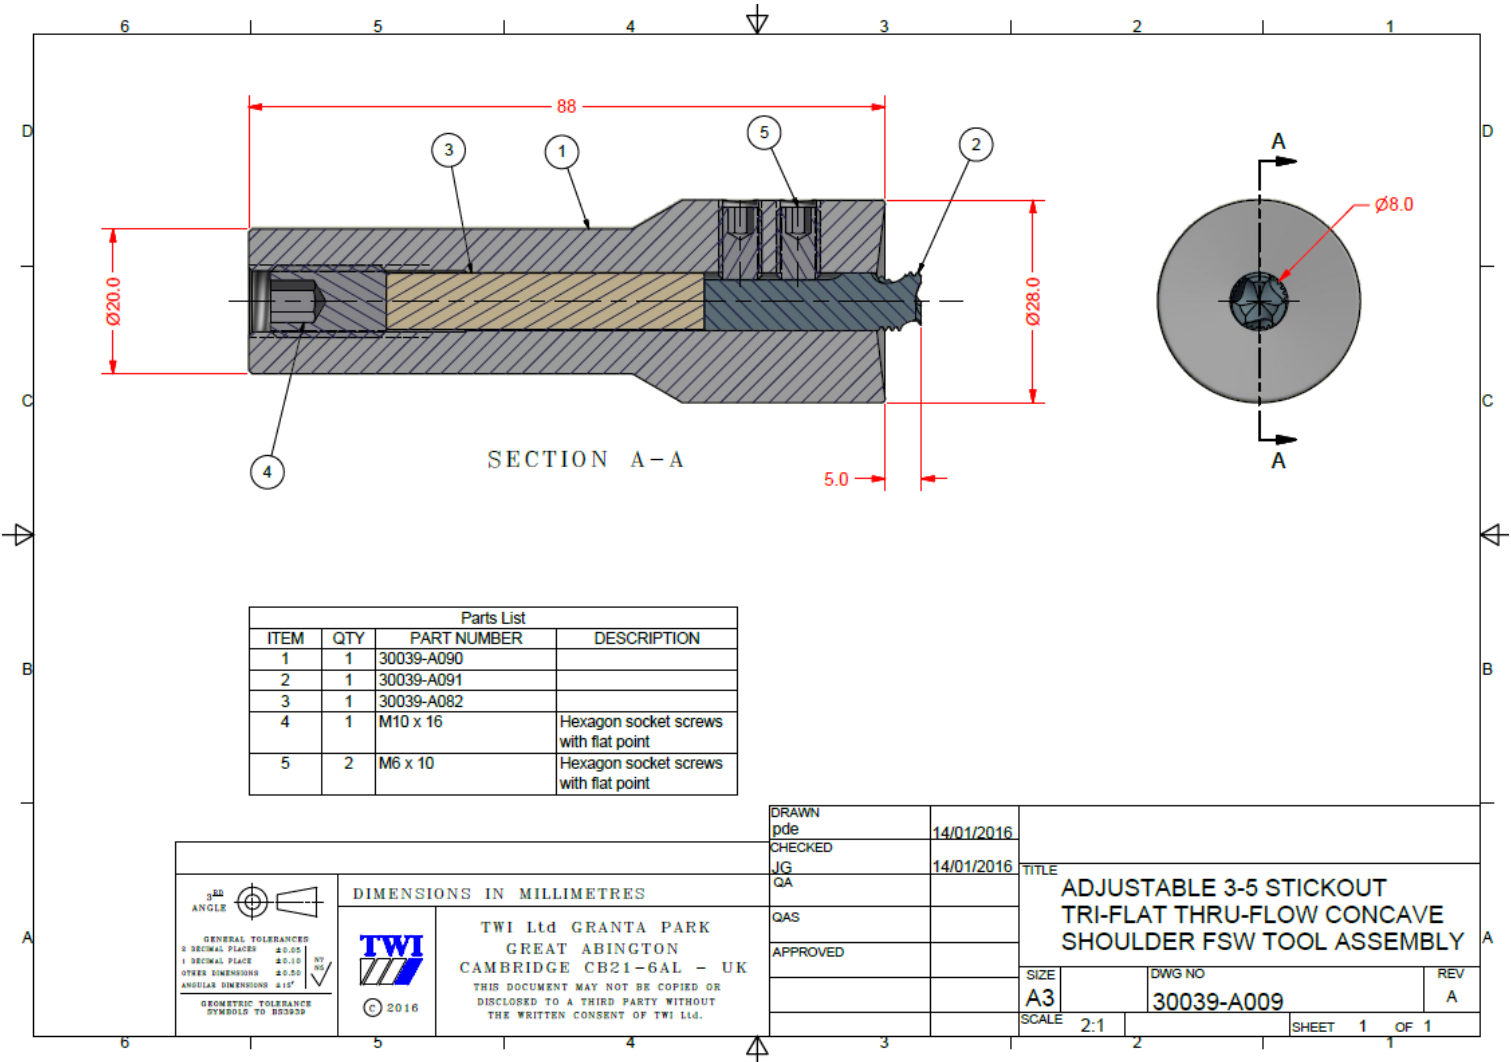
Assembled FSW tool for the 3 to 5 mm thickness combination
